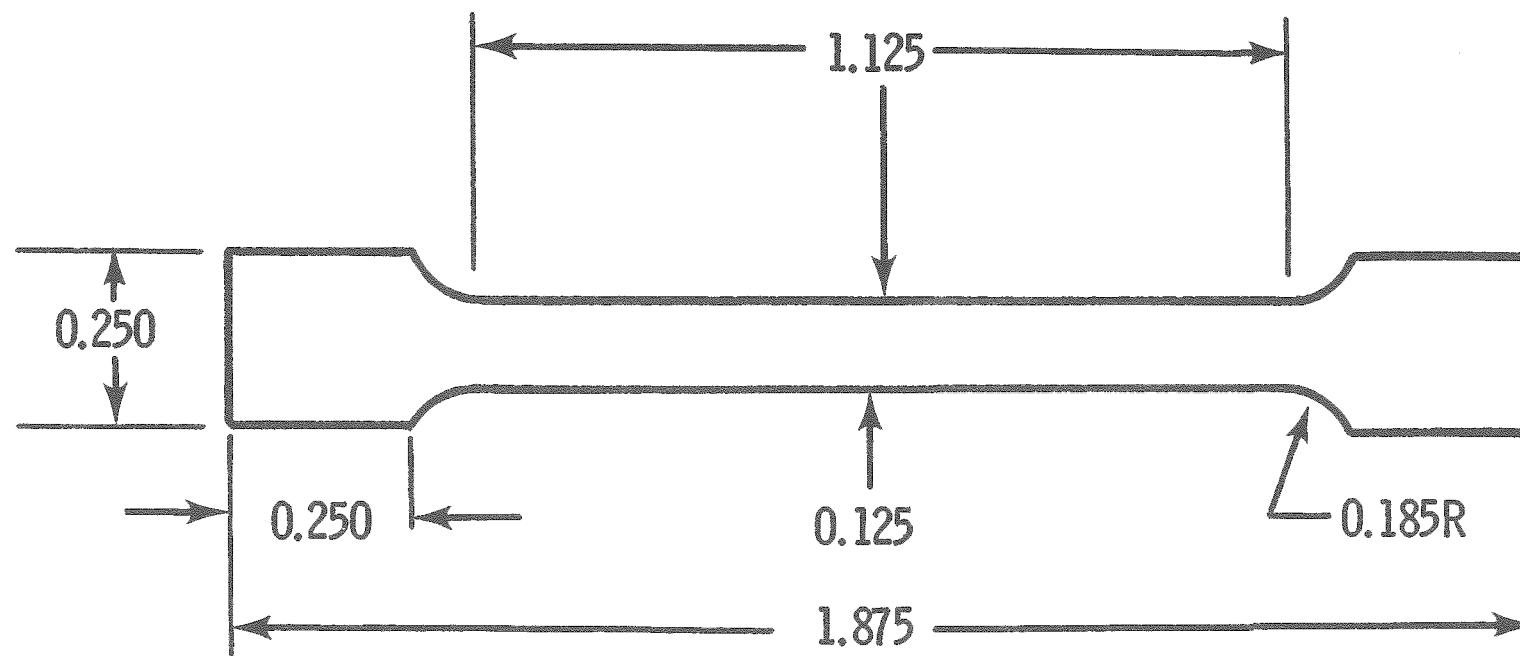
Tensile Specimen Geometry (Dimensions in inches).
